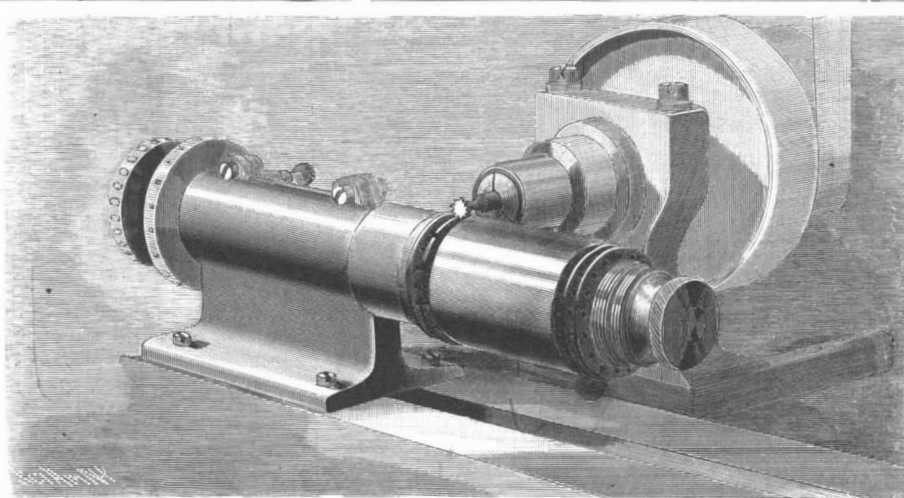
CUTTING SLOTS IN HUB FLANGES.
